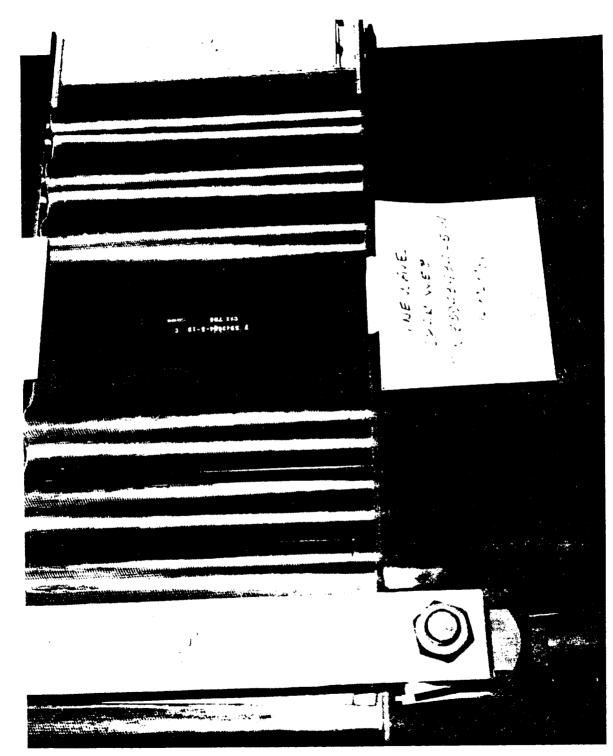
SINE-WAVE SHEAR WEB COMPONENT IN TEST FIXTURE
